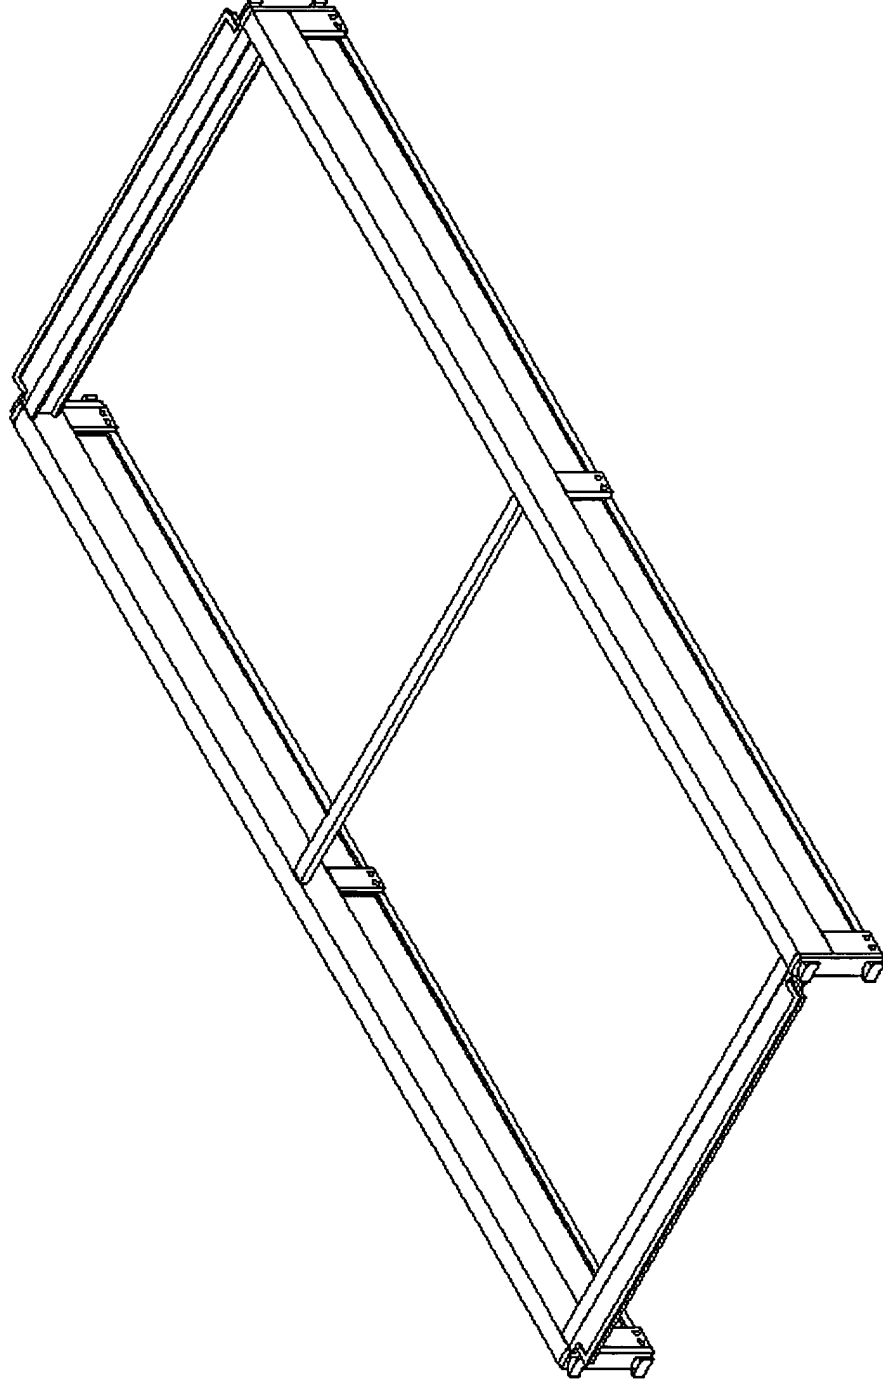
D: Isometric view of a ceiling frame (20 foot high cube collapsible cargo container)
